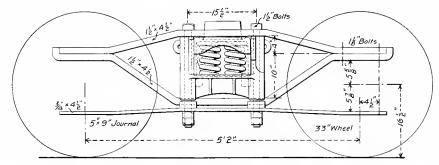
Arch Bar Truck Side Frames. American Steel Foundries.
